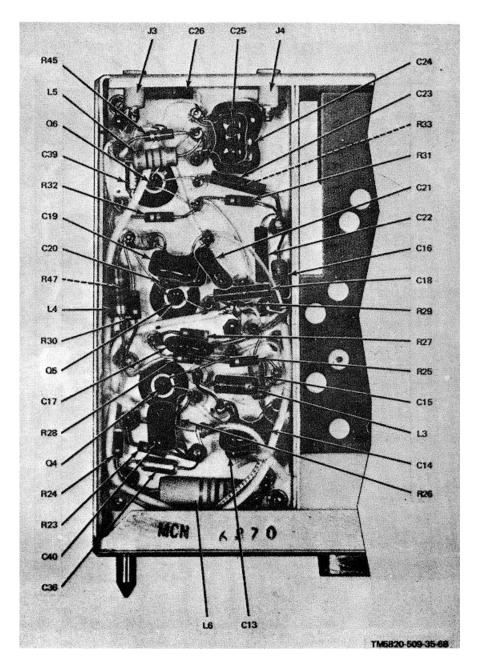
Radio Frequency Oscillator O-1032/PRC-47 (A8A6), Side View, Cover Removed, Chassis Assembly.
